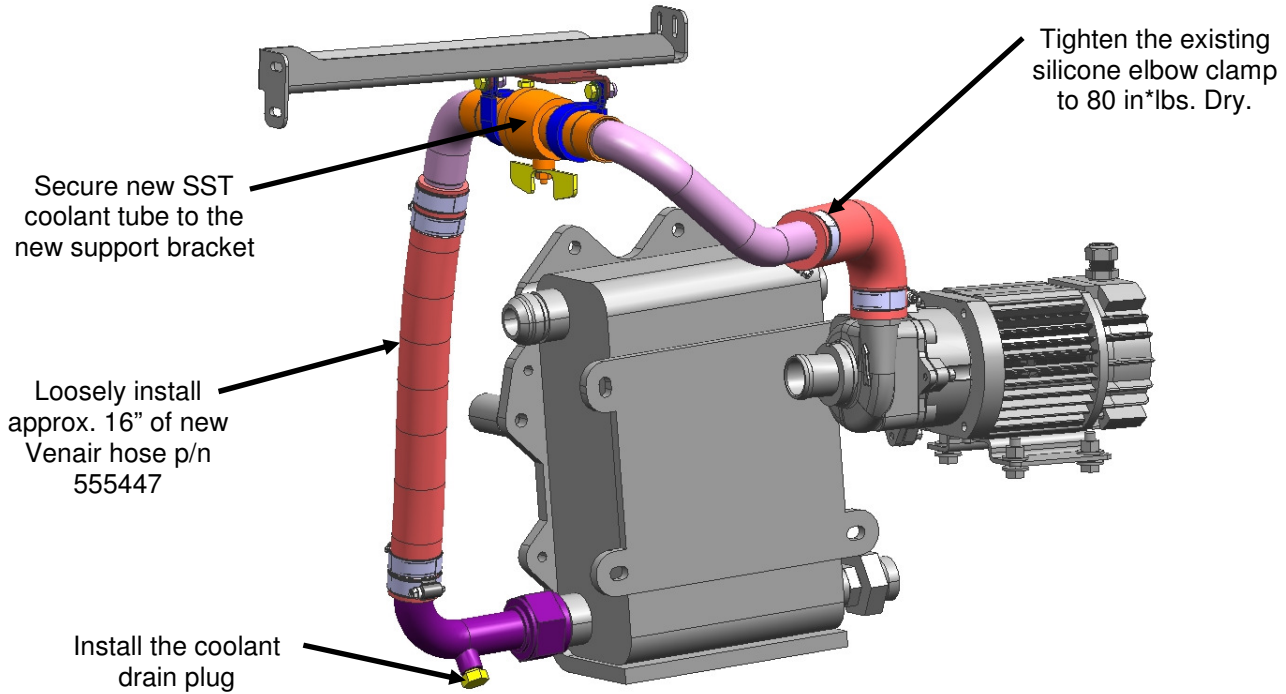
Cabin Heat Coolant Tube Assembly Installation
